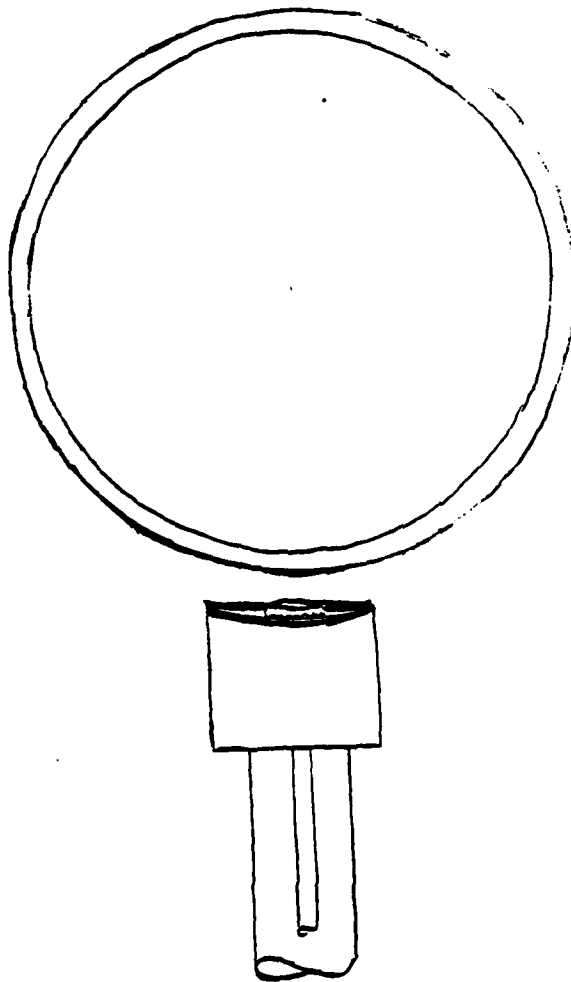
SPECIAL SHIELDING FOOT FOR STUD WELDING
